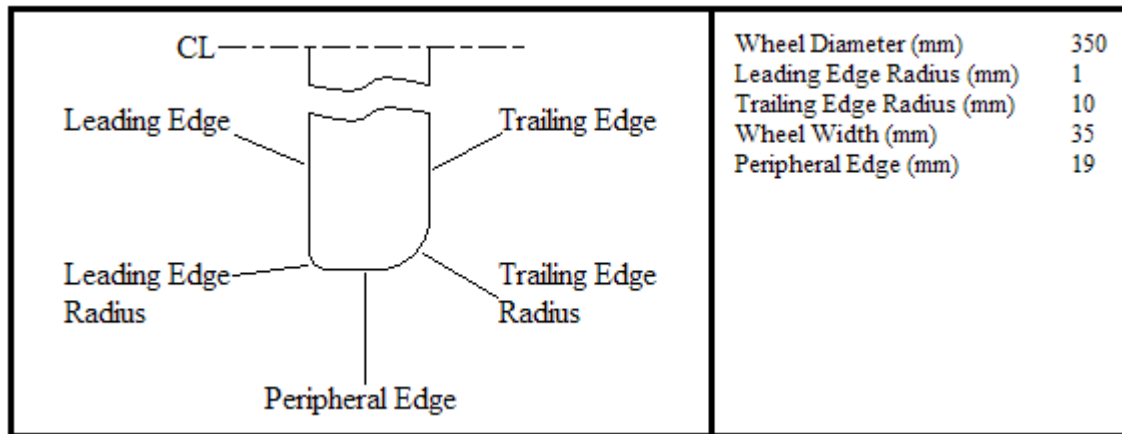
Schematic showing the geometry of the cylindrical grinding wheel
